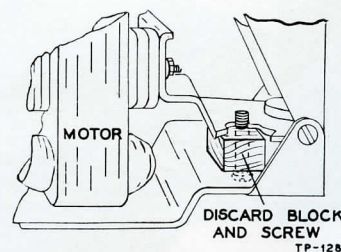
SHIPPING BLOCK—BACK END OF MOTOR
